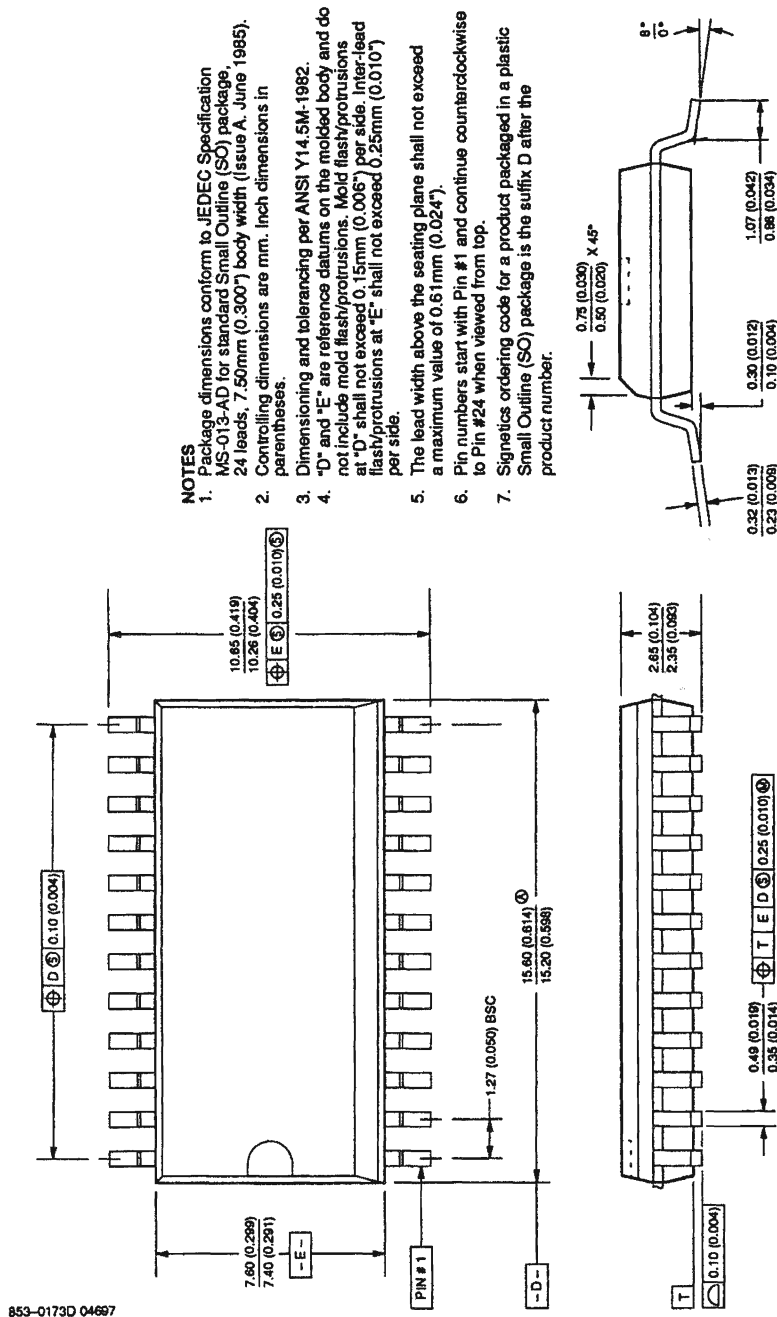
24-pin (300 mils wide) plastic SOL (Small Outline Large) dual in-line (D) package (DWG 0173D).
